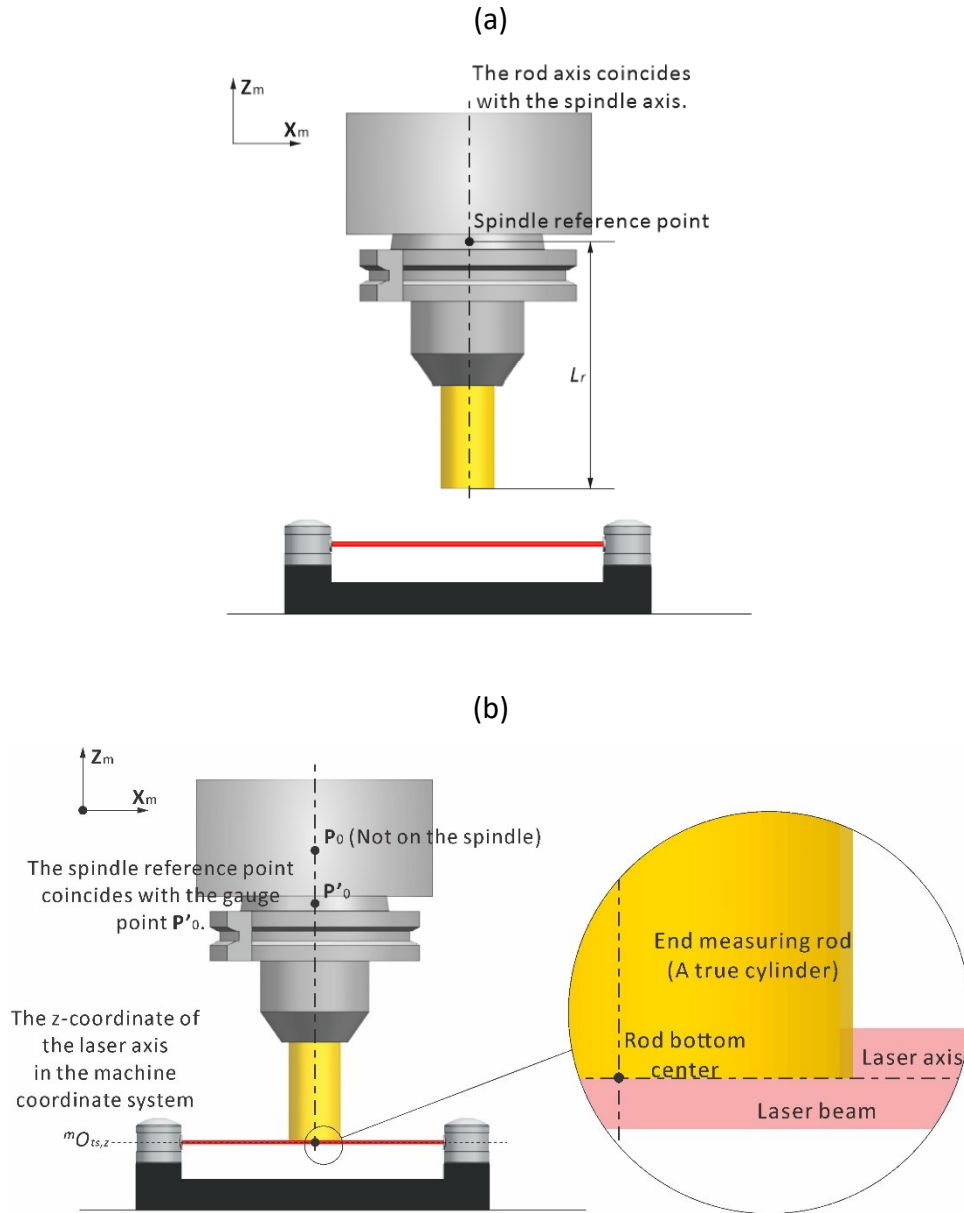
A laser tool setter is perfectly set up on a CNC machining center.
